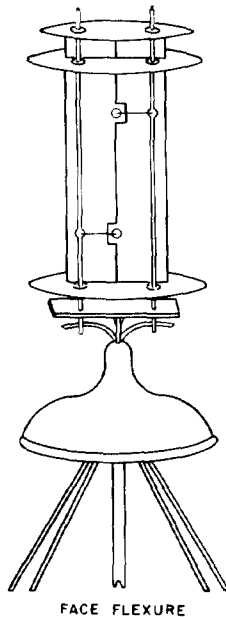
Cage assembly for solder-cone wire mounting of low-frequency length-width flexure crystal
